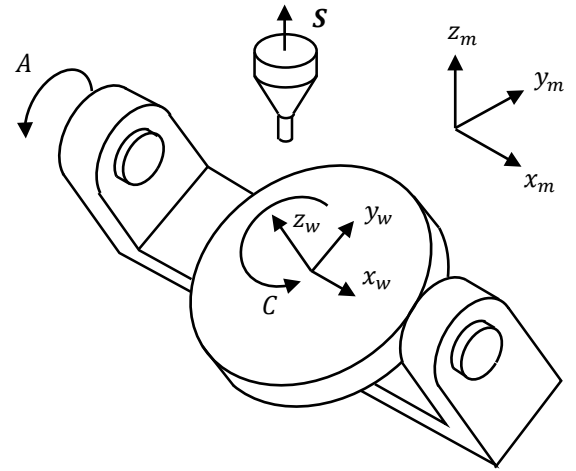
Five-axis CNC machine of the XYZAC type (table-tilting machine).
